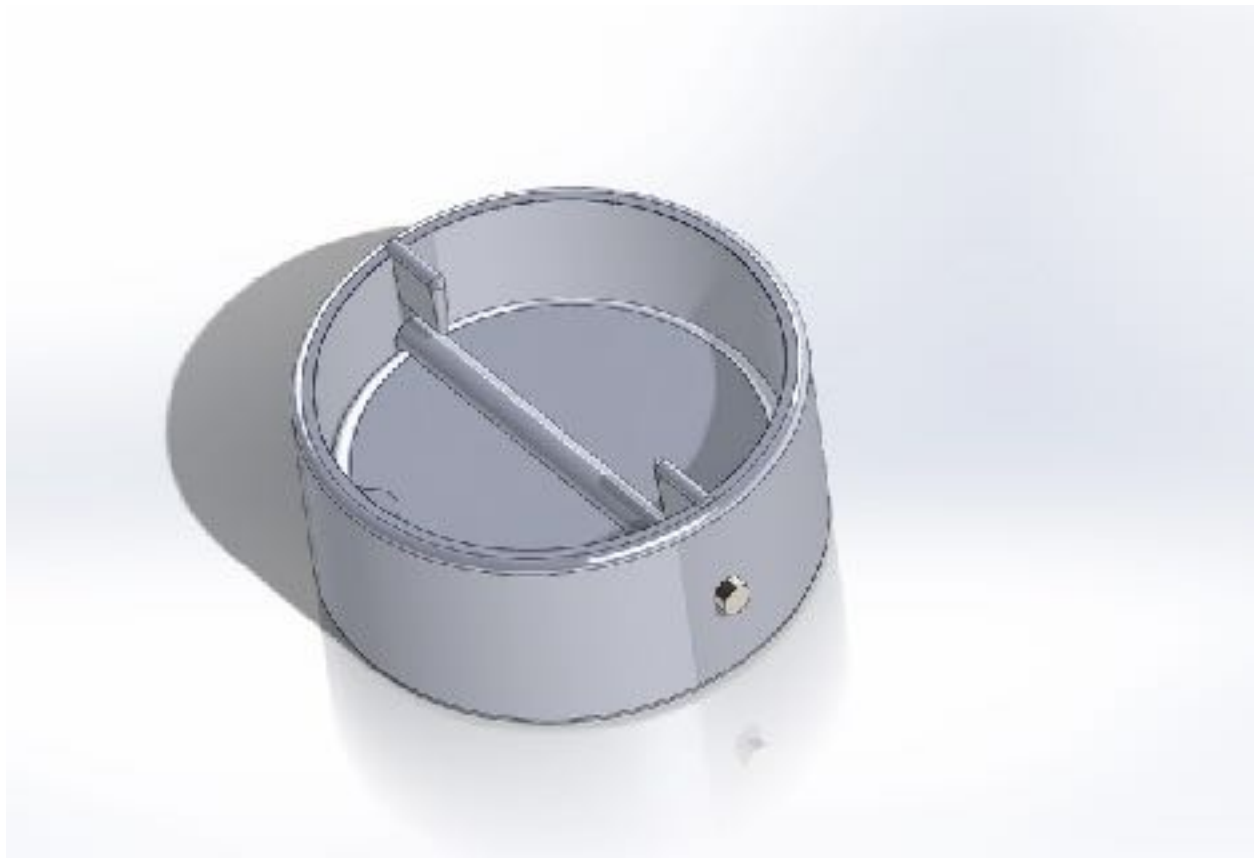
SOLIDWORKS MODEL OF TILTING DISC VALVE
